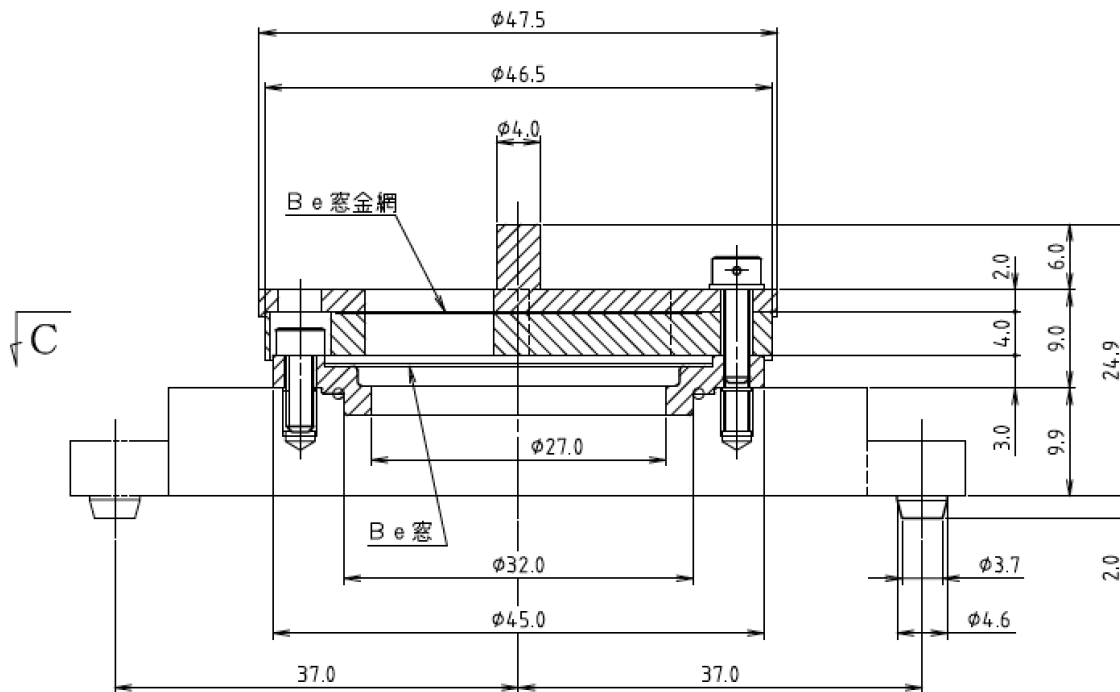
Cross section of gate valve window support structure. This figure is a portion of SHI drawing KK0391T. The Be sits beneath the 6 mm-thick (4 mm + 2 mm) cross structure.
